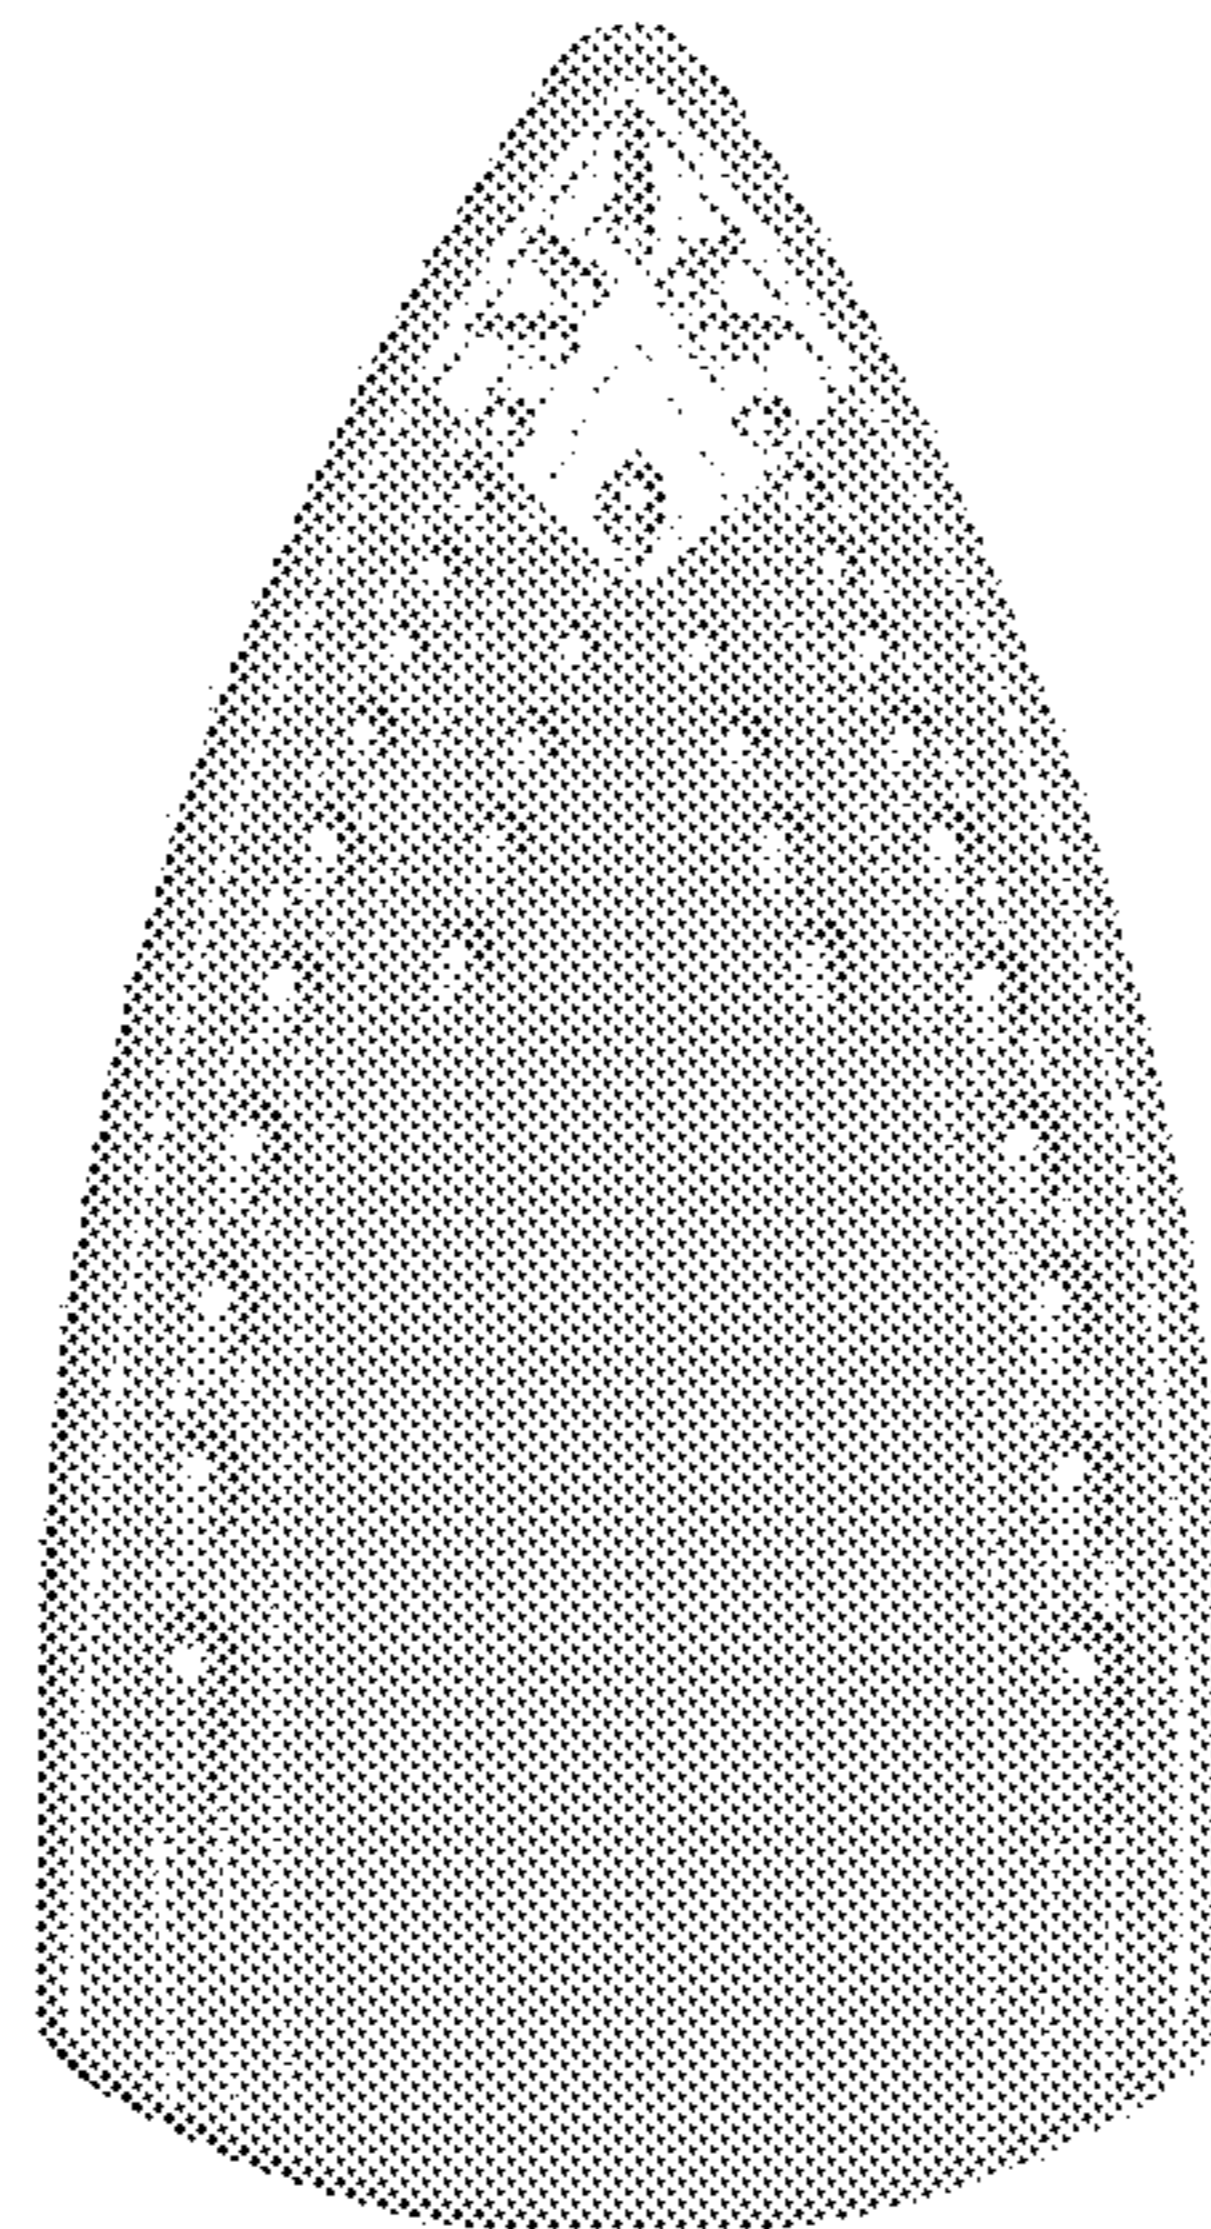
is a front elevational view of the soleplate of FIG. 1.
